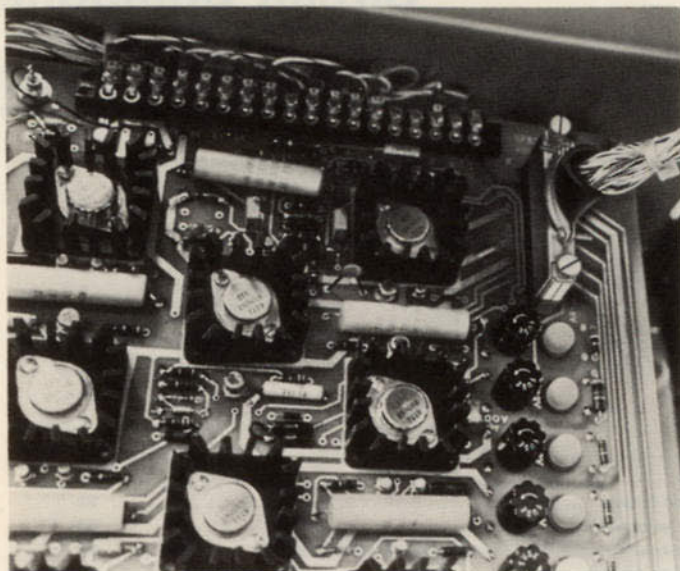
Printed-wiring components and hardware (Winchester Electronics, Oakville, Conn.).
